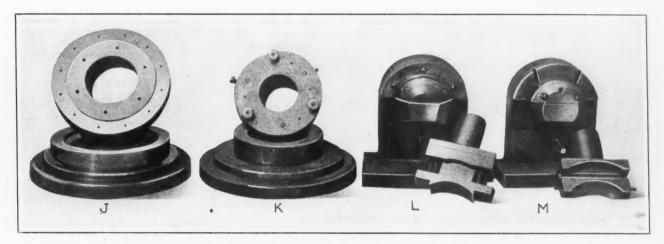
(J) Flange-forming Die; (K) Perforating Die for Holes J, Fig. 4; (L) Die used to perforate Slot K, Fig. 4; (M) Die for bending in Edges of Slot K
